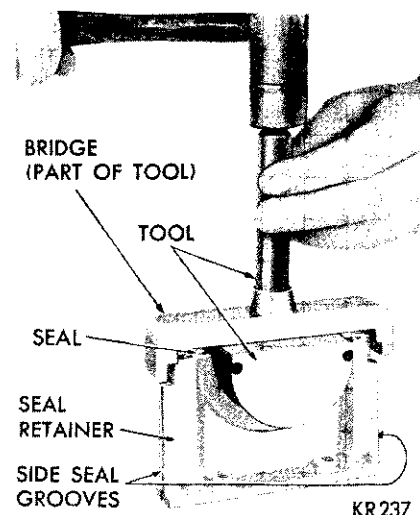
Installing Rear Main Bearing Lower Oil Seal
